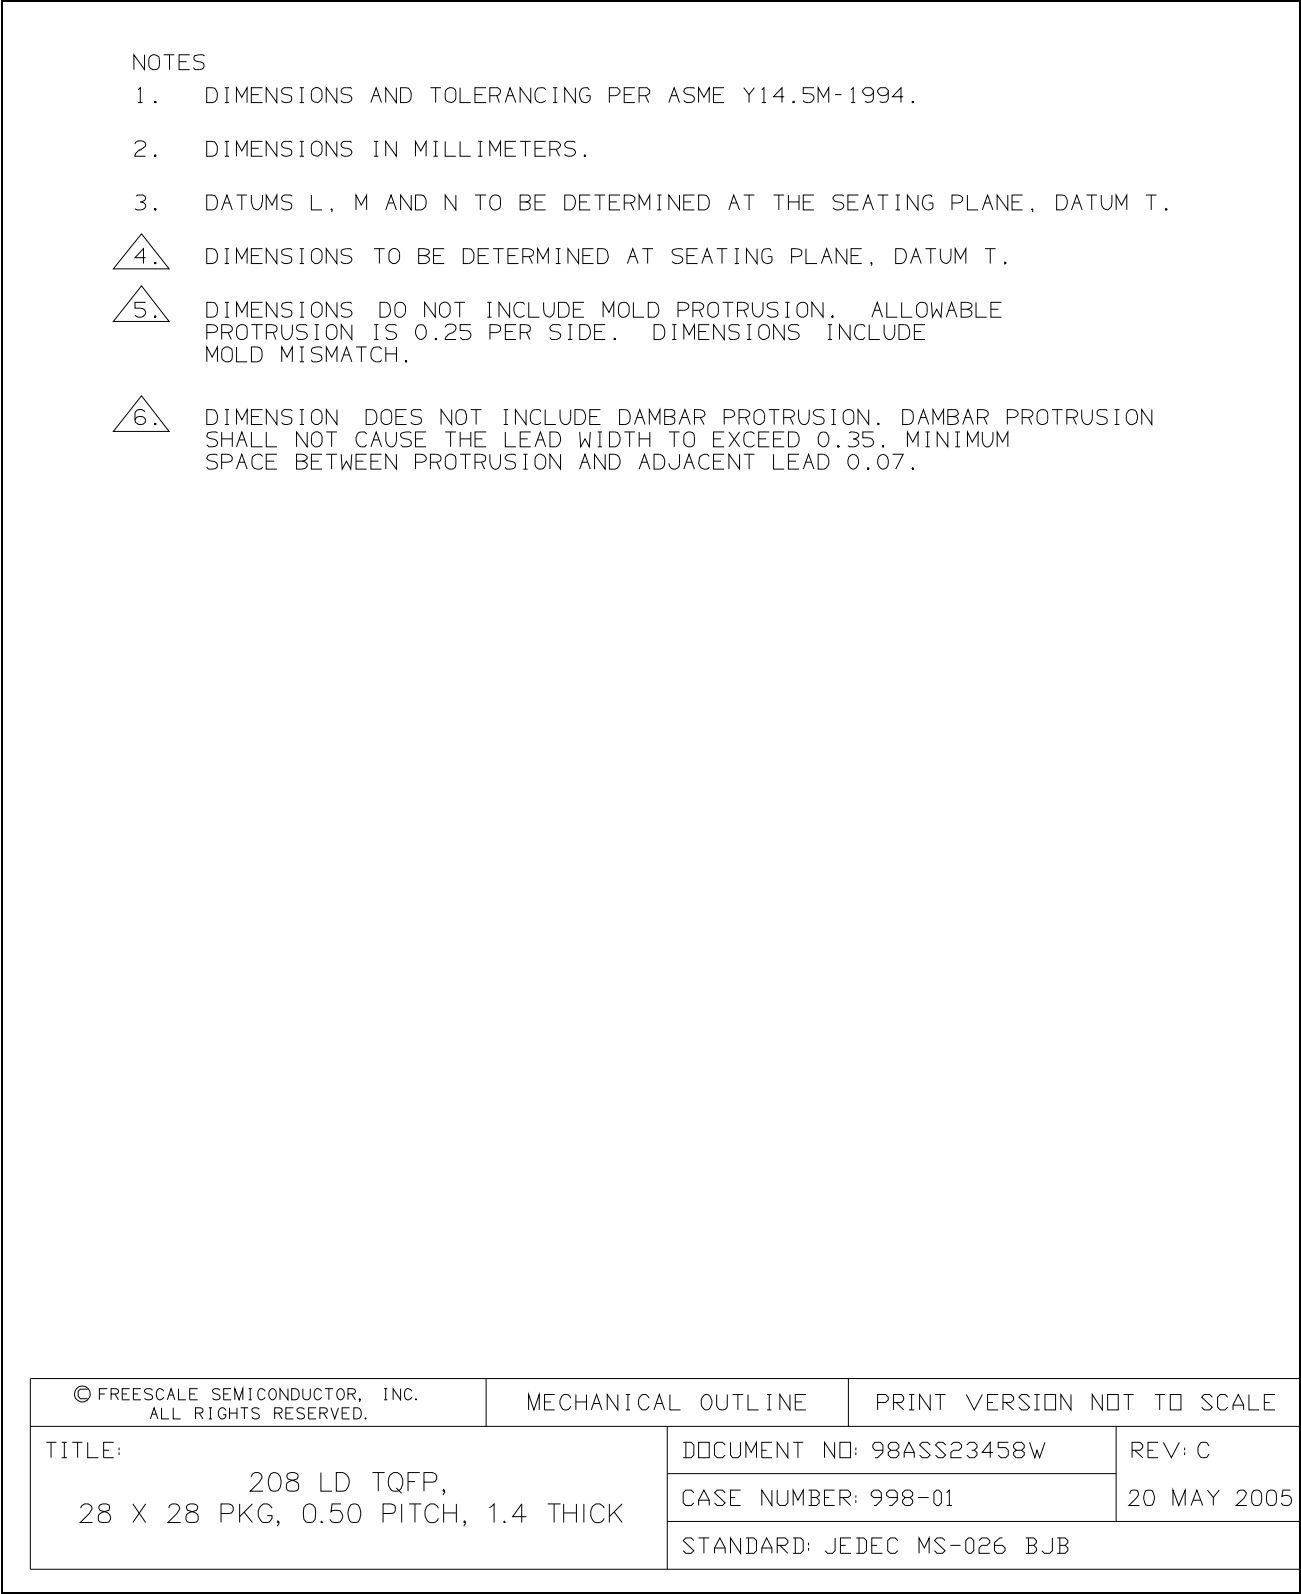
208 LQFP mechanical drawing (Part 3 of 3)
